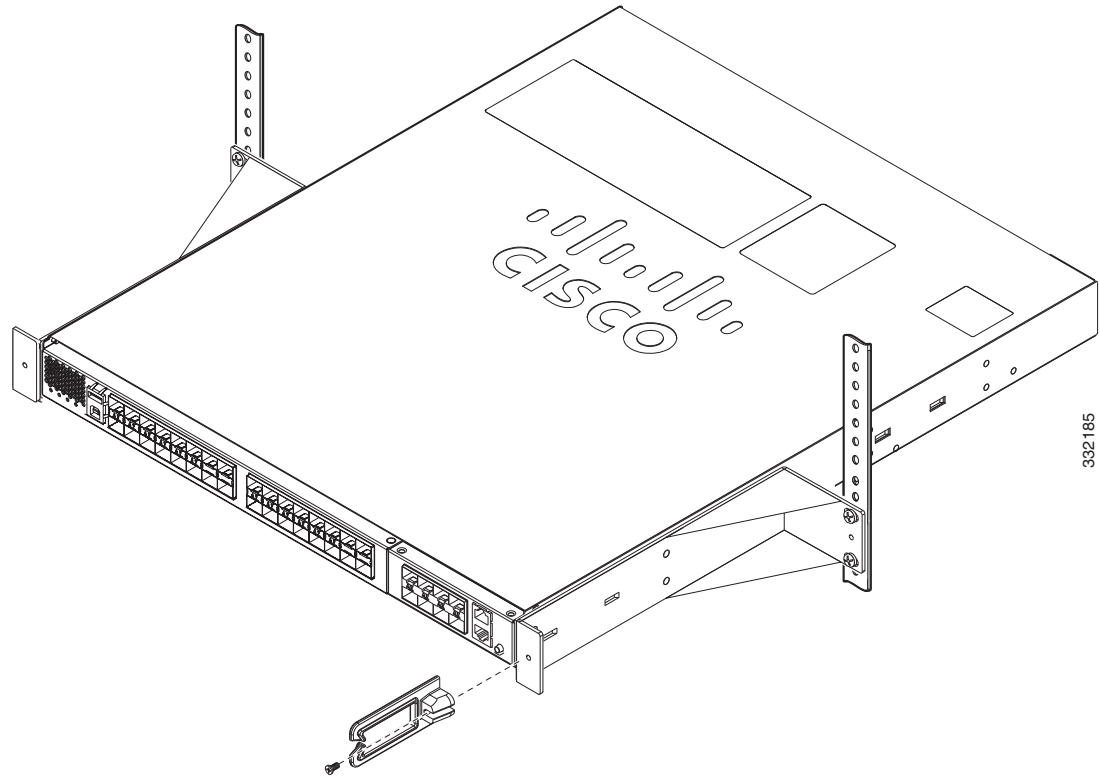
Mounting the Chassis in the Equipment Rack Using the Center Rack-Mount Kit (23-Inch Rack-Mount Kit Shown)
